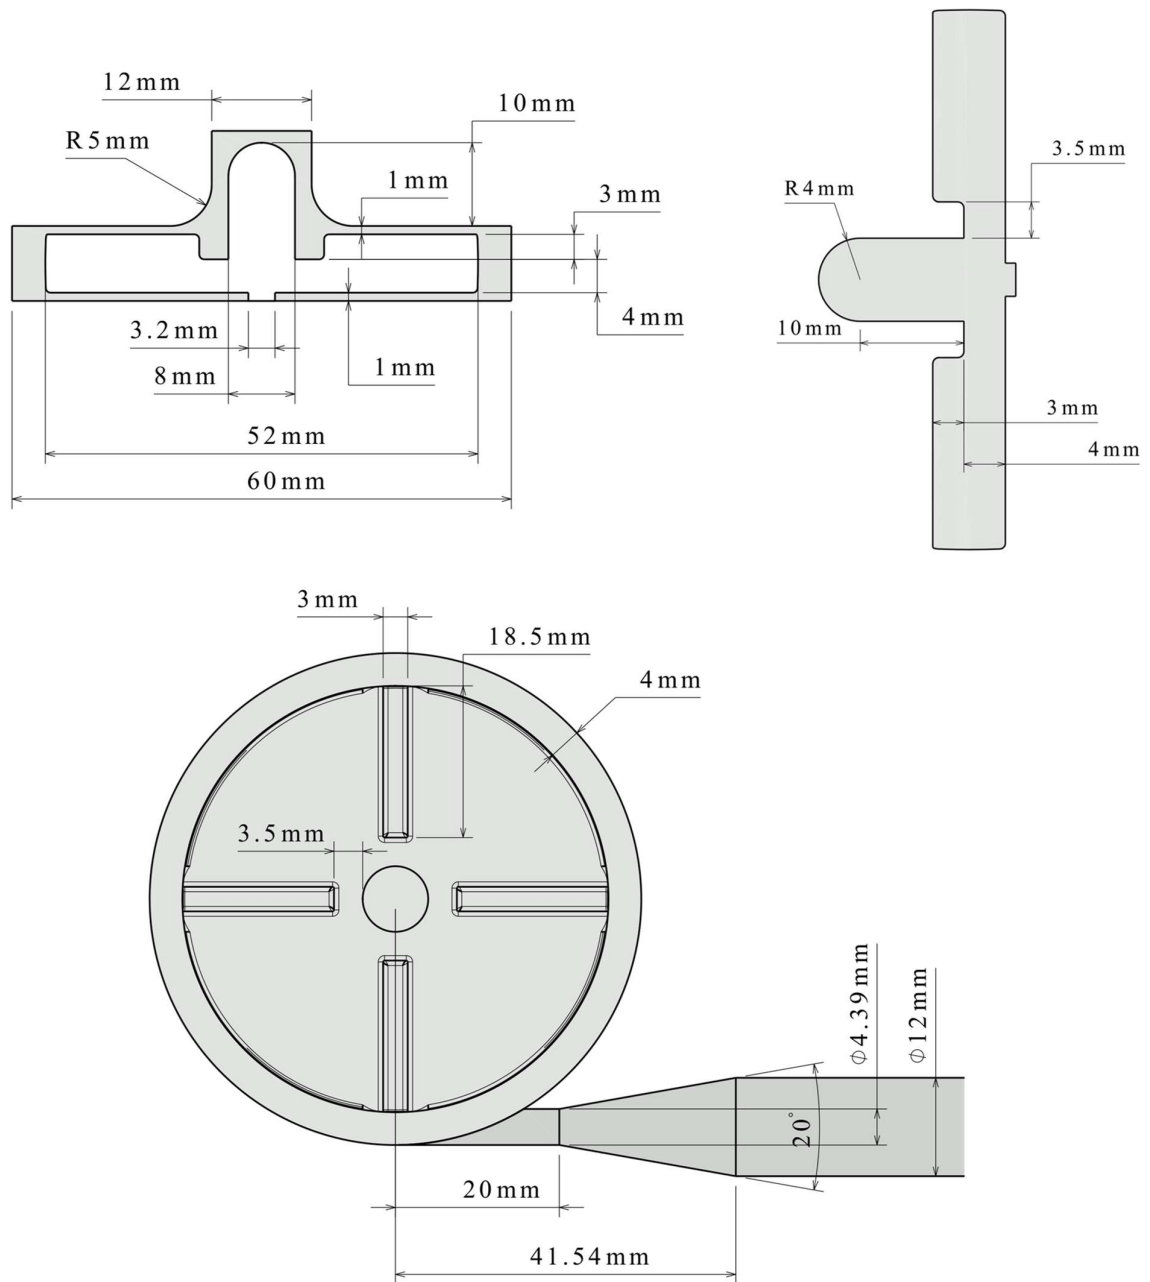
Dimensioning of the rotor of the FDA pump benchmark model [88].
